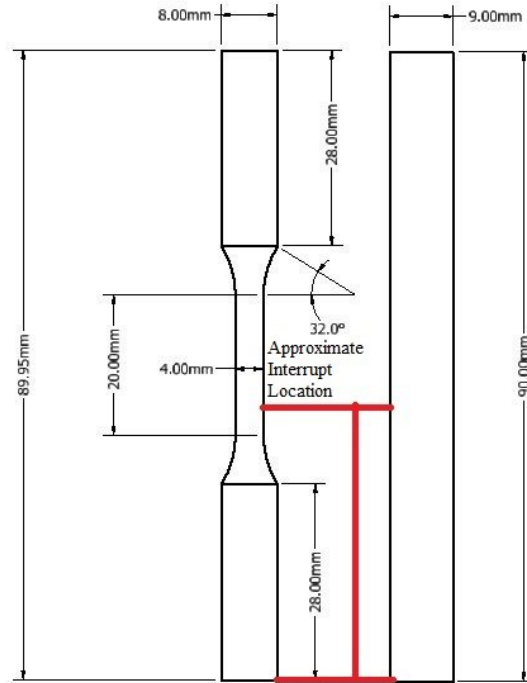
Drawings of the dimensions used for specimens given in mm.
